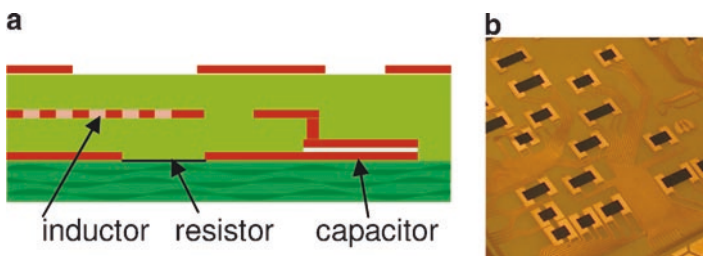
(a) Embedded inductor, resistor, and capacitor in the build-up layers of a printed wiring board; (b) Printed resistors on a flexible printed wiring board before lamination into a build-up layer
